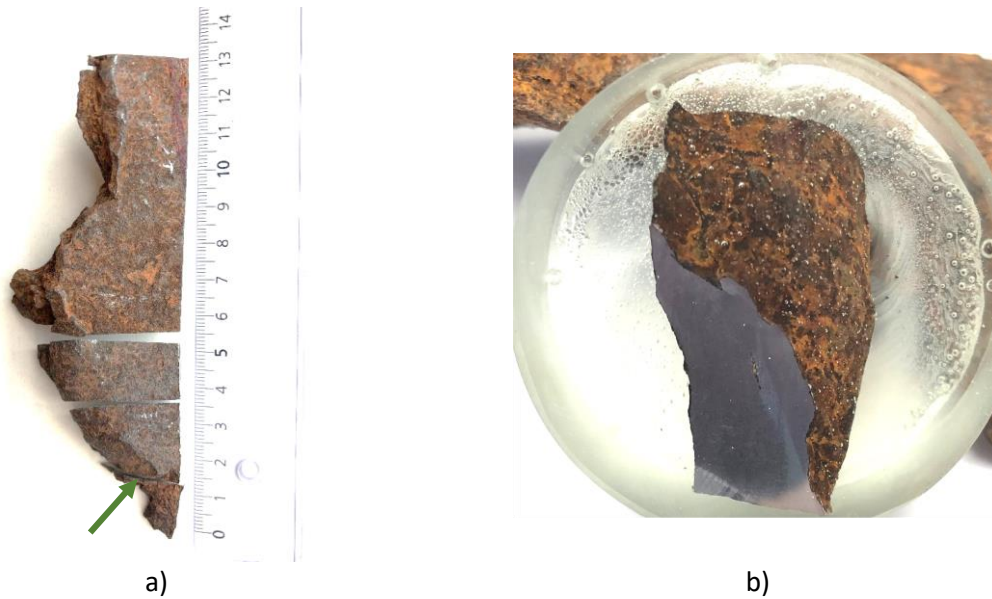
Sample 3 is taken from a region where the fracture surface is almost smooth.
